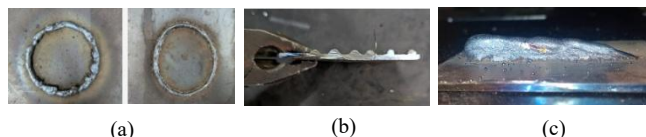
Samples of printed components (a) single layer circular prints; (b) cross-section of one sample; (c) multi-layer print
